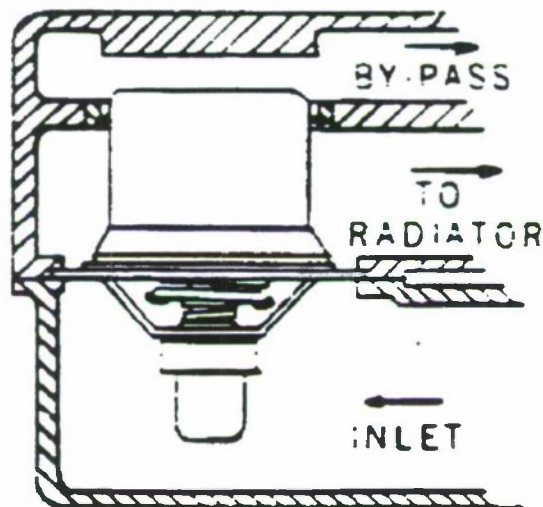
Pellet Type Thermostat with Sleeve Valve (Top Bypass)
